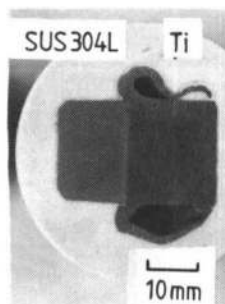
Macrostructure of cross-section of weld joint shown in Fig. 3.
